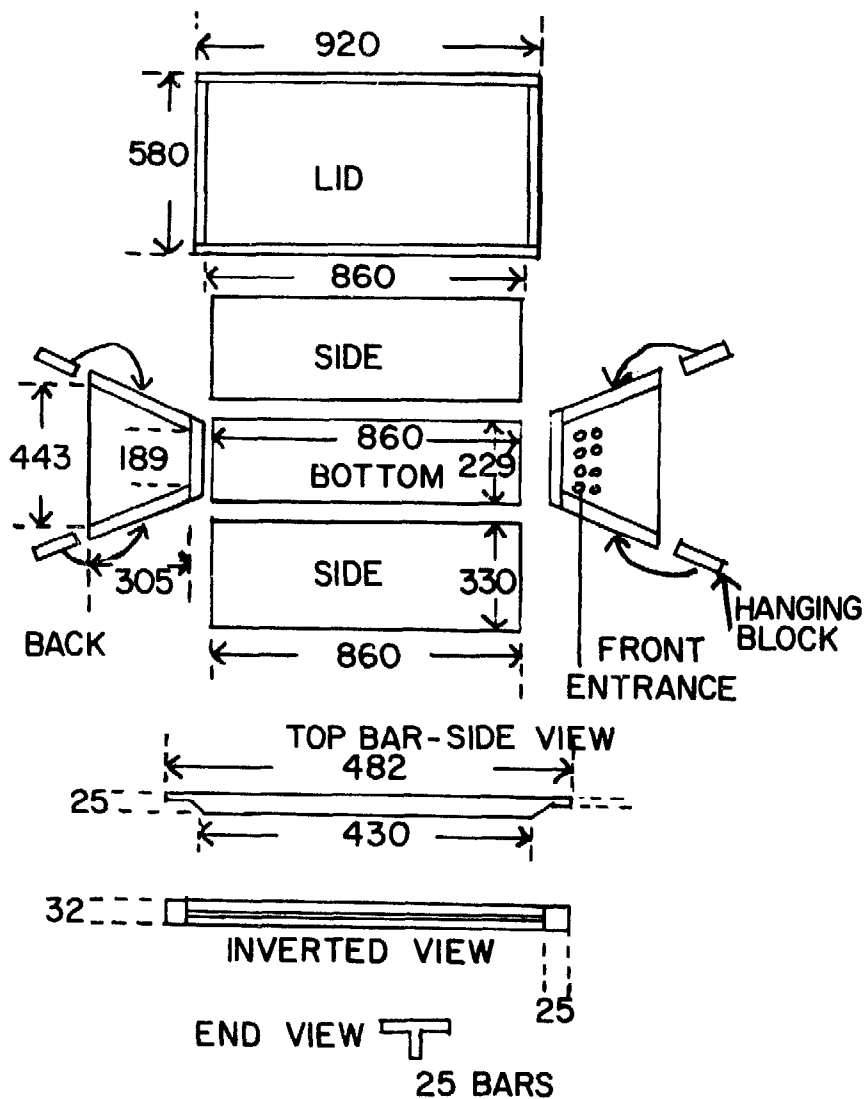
/12 Kenya top-bar hive. Dimensioned drawings based on 19-mm lumber. All measurements in mm. The side panels form an angle of 130° with the base.
